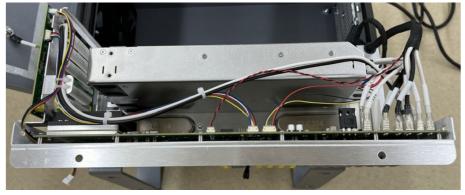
Screw position, power ground connection location and sheet metal module placement
